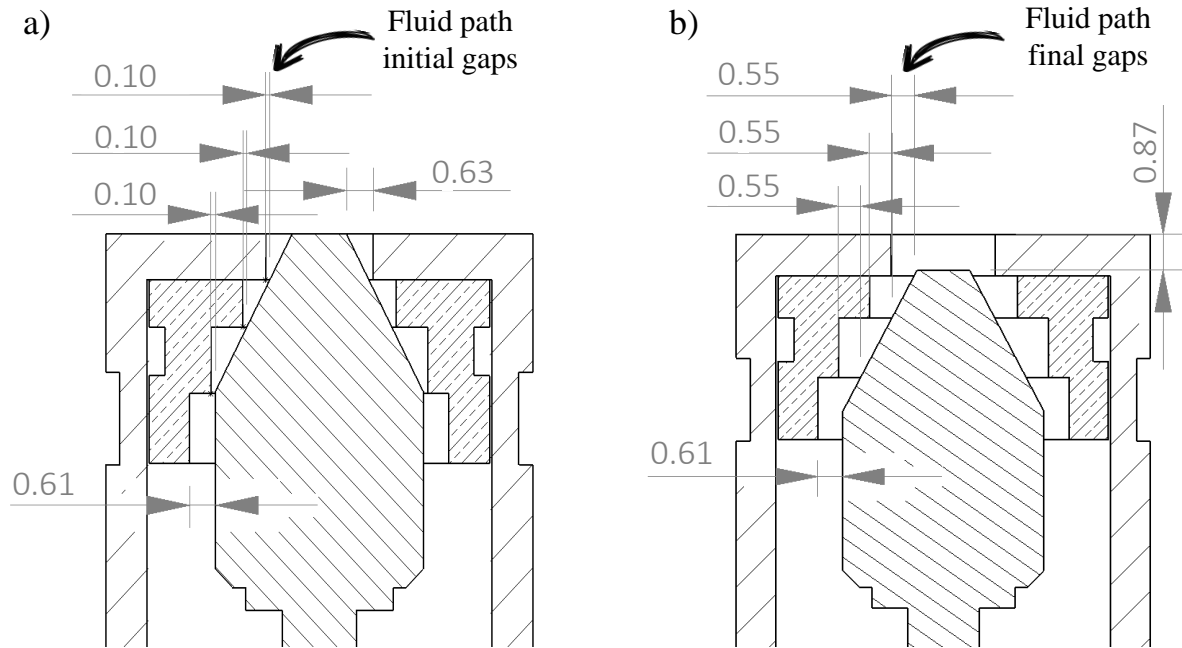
Schematic drawn of the valve with its main dimensions (dimensions in millimeters).
